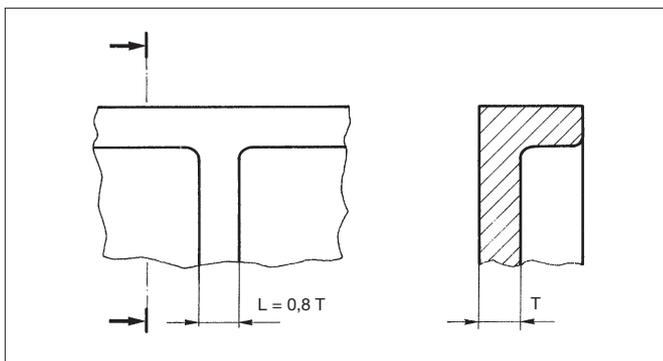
Ribs in Vibration Welded Parts
